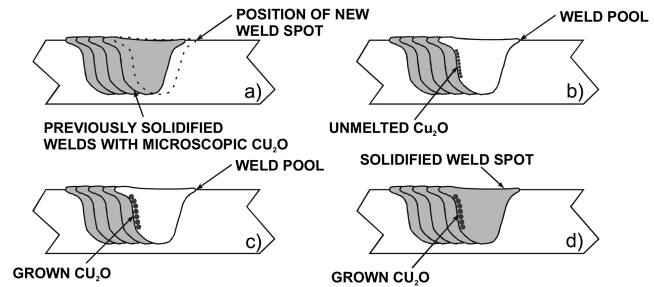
Schematic of a longitudinal section of a laser seam weld and the stages of oxide growth near the trailing edge of the new spot weld: (a) sketch of previous welds; (b) new weld pool is made, but microscopic oxide at edge of weld does not melt into the weld pool; (c) the unmelted oxides grow by diffusion; and (d) the larger oxide particles are trapped in the solidification structure when the weld pool solidifies.
